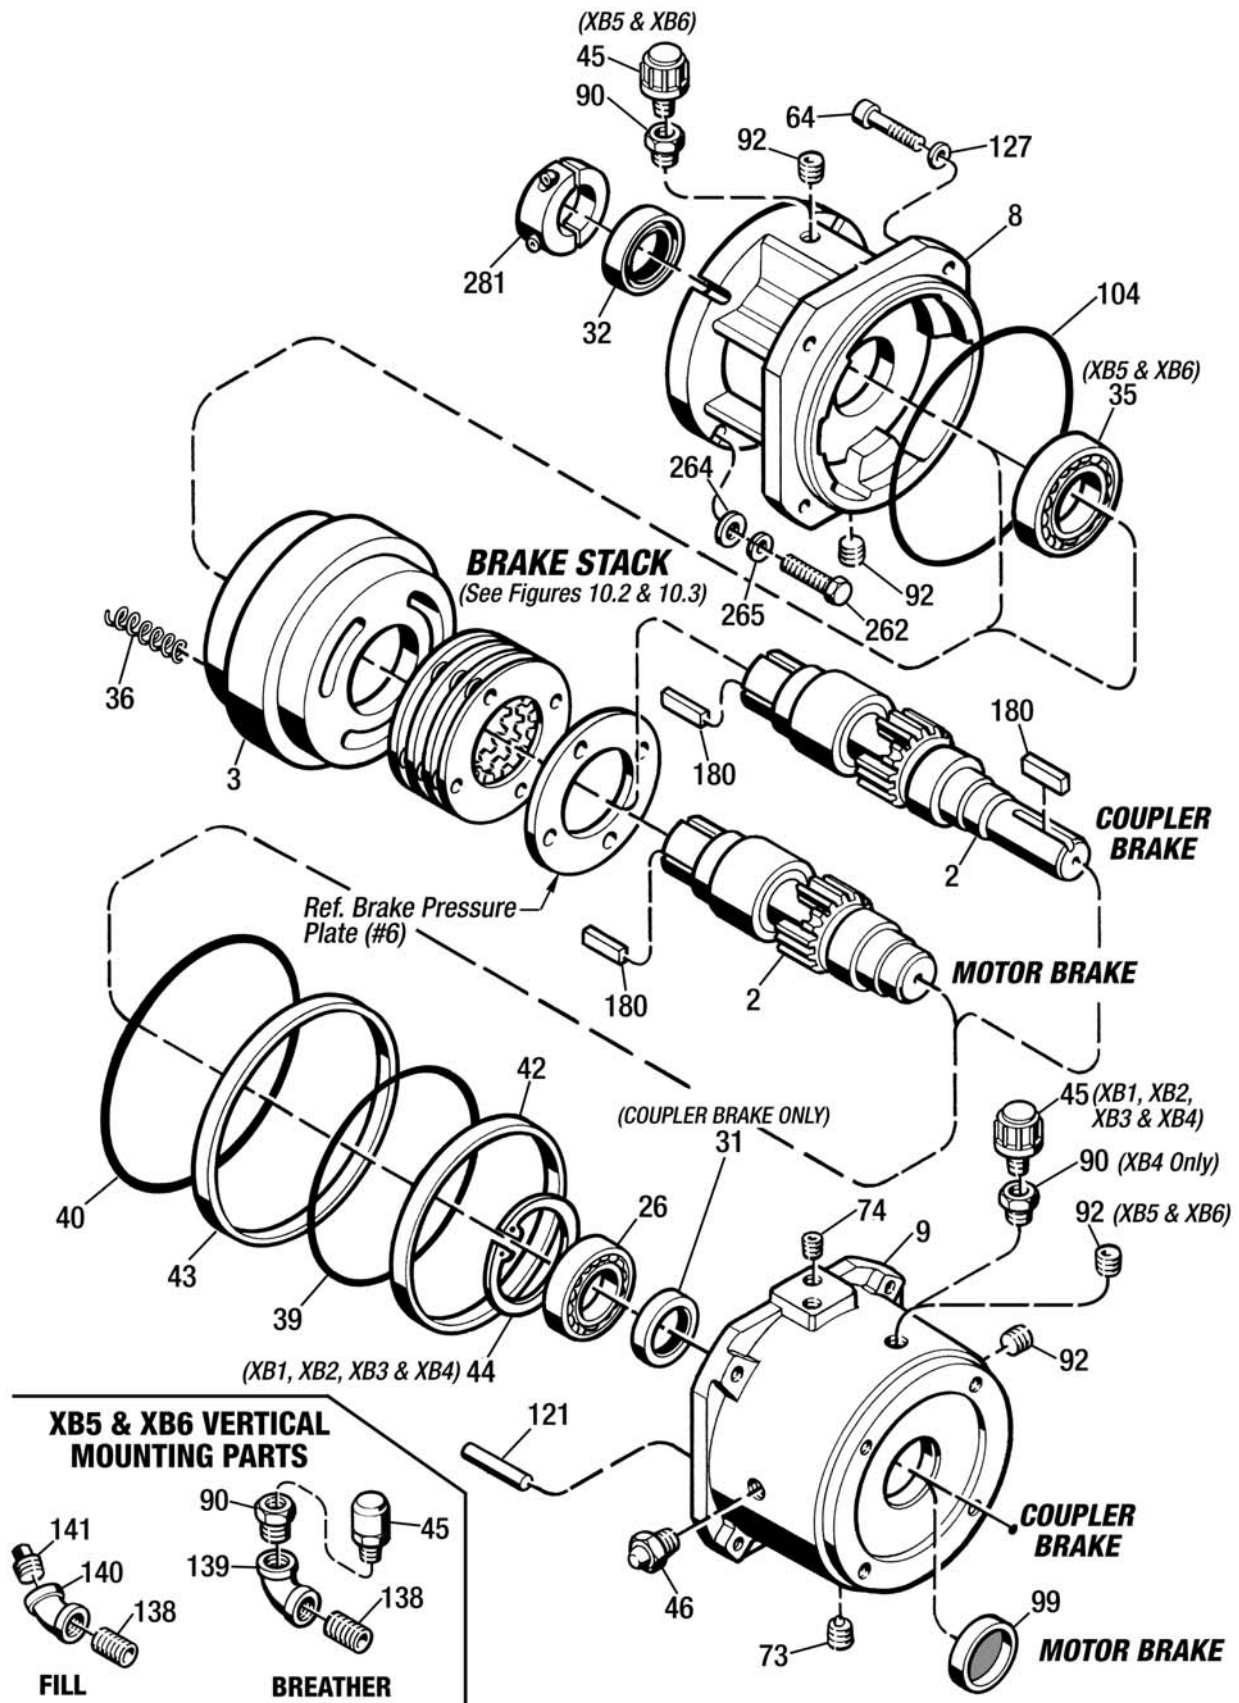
Posistop X Class Coupler and Motor Brake
